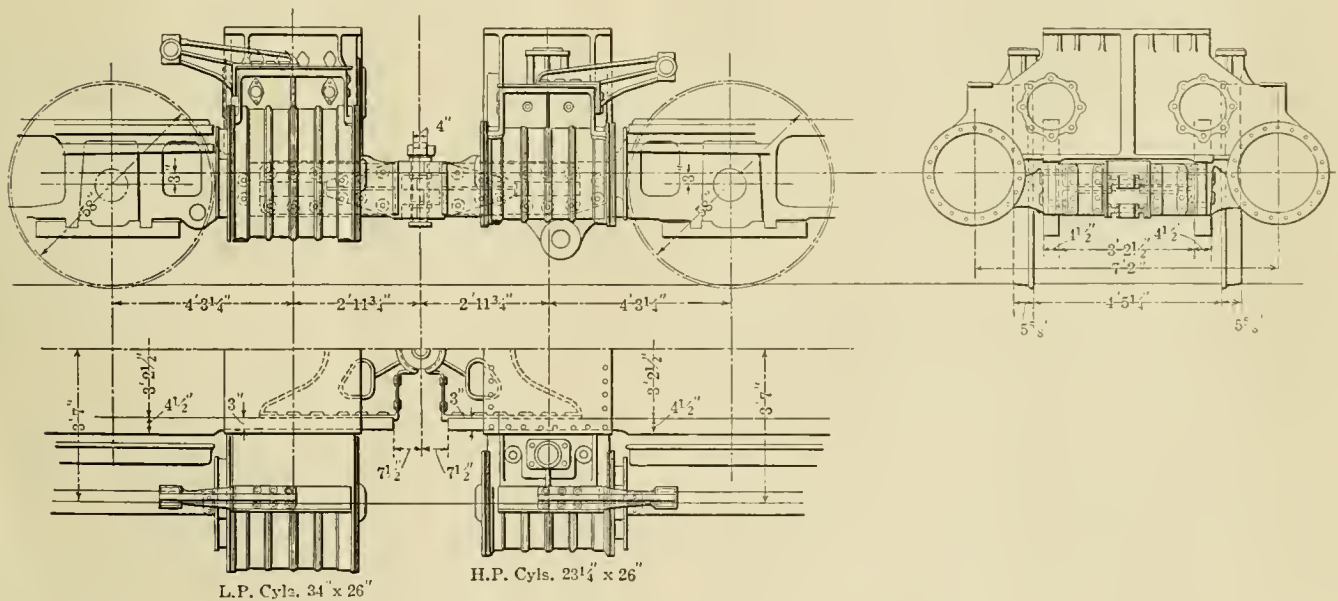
ARRANGEMENT OF CYLINDERS AND FRAME CONNECTIONS.
